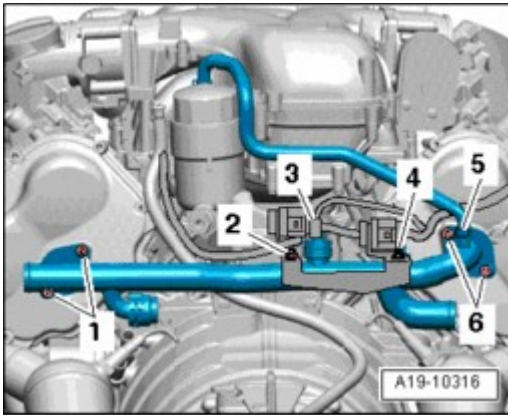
Identifying Nuts, Bolts, Electrical Connector On Engine Coolant Temperature (ECT) Sensor G62 & Coolant Hose
